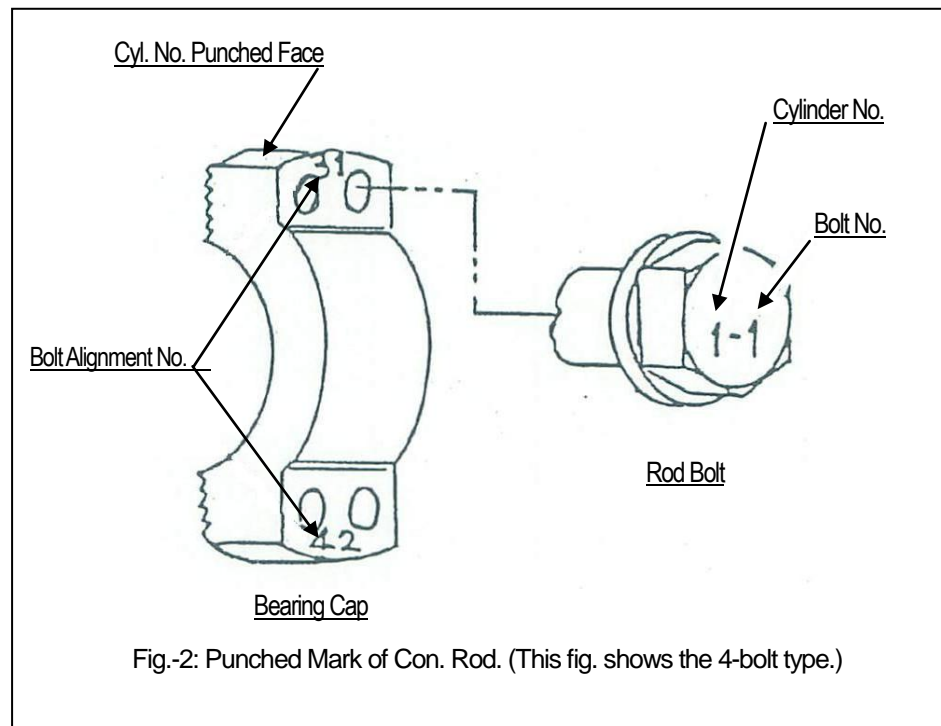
Punched Mark of Con. Rod. (This fig. shows the 4-bolt type.)
